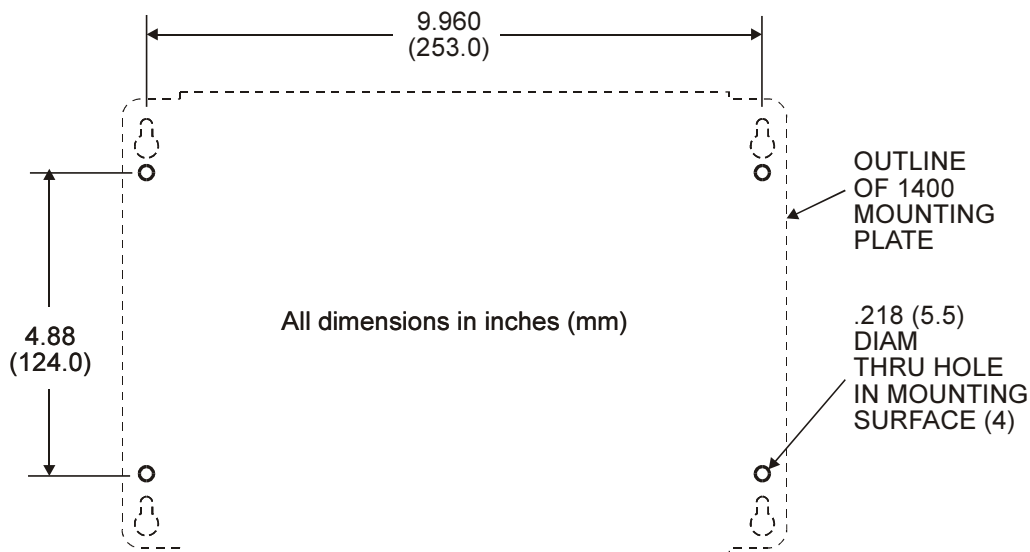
1400 Unit Dimensions for Mounting to the 8-32 Threaded Pem Nuts
